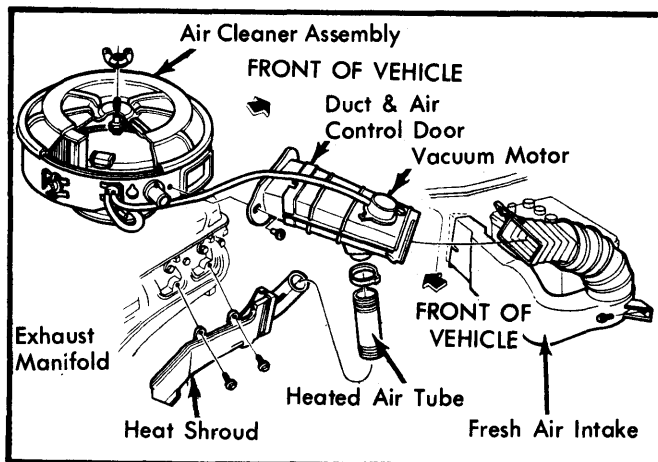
Typical Thermostatic Air Cleaner Assembly (Ford Motor Co. V8 Shown, Other Makes, Models and Engines are Similar)
